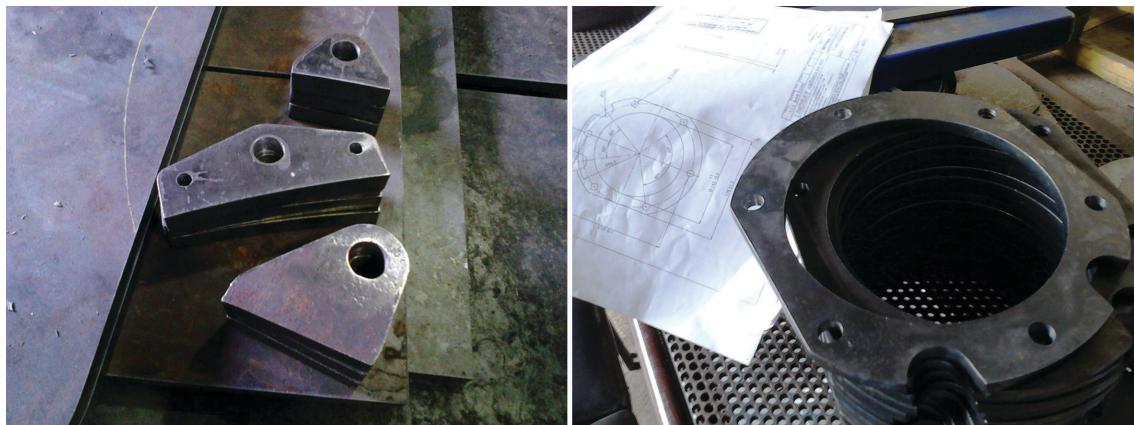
Parts commonly produced by the company's CNC plasma cut machines.
